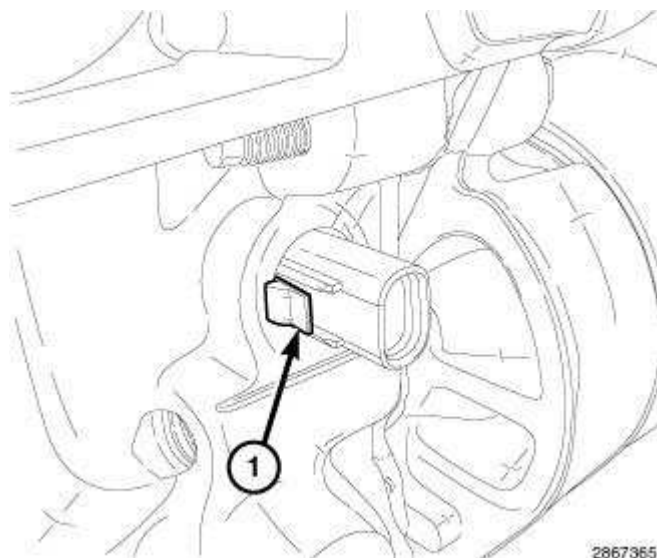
Oil Pump Solenoid Electrical Connector Retention Lock Tab
